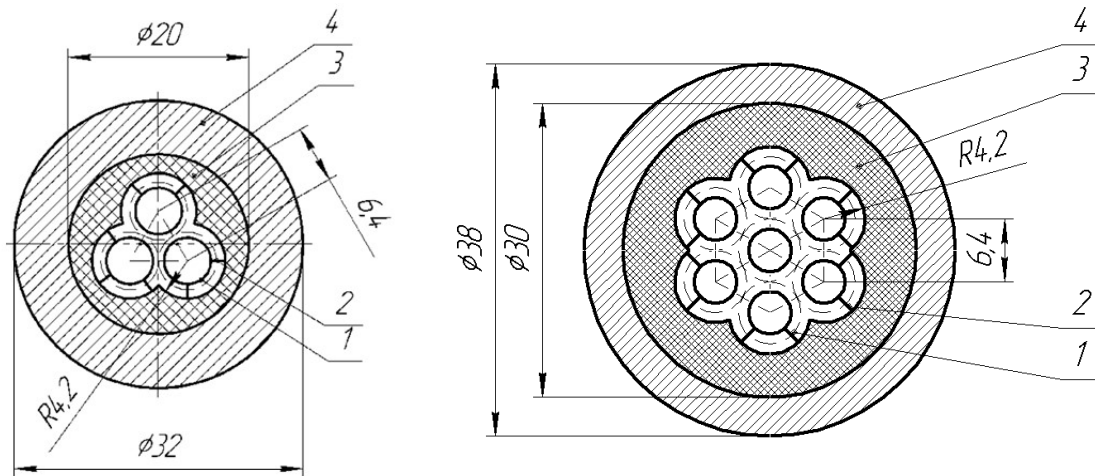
Cross section of bundle test sections (1 – heated rod (rod); 2 – distancing rib; 3 – shaped dielectric displacer; 4- pressure tube).
